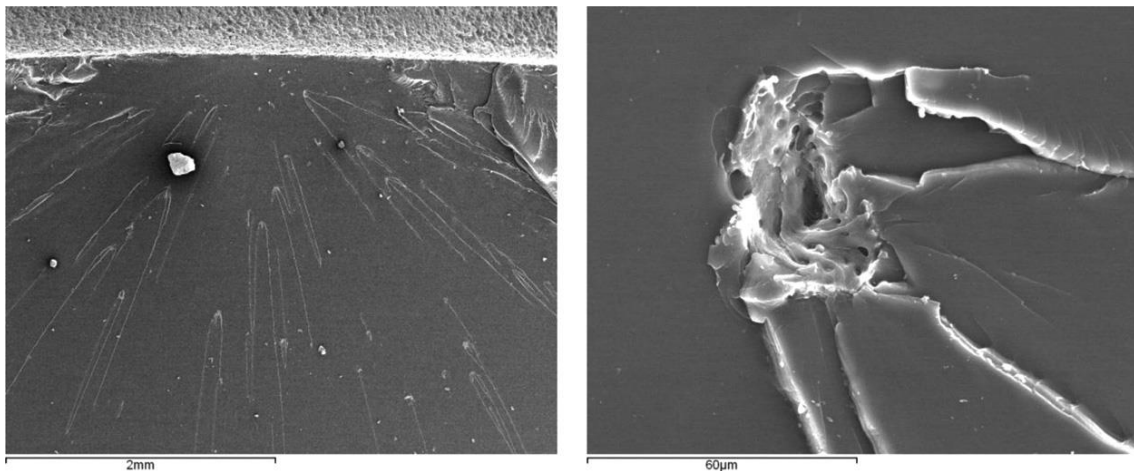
Fracture surface of a specimen with 1% of untreated cork (38–53 µm). Left—overview of fracture surface; Right—detail of fracture surface.
